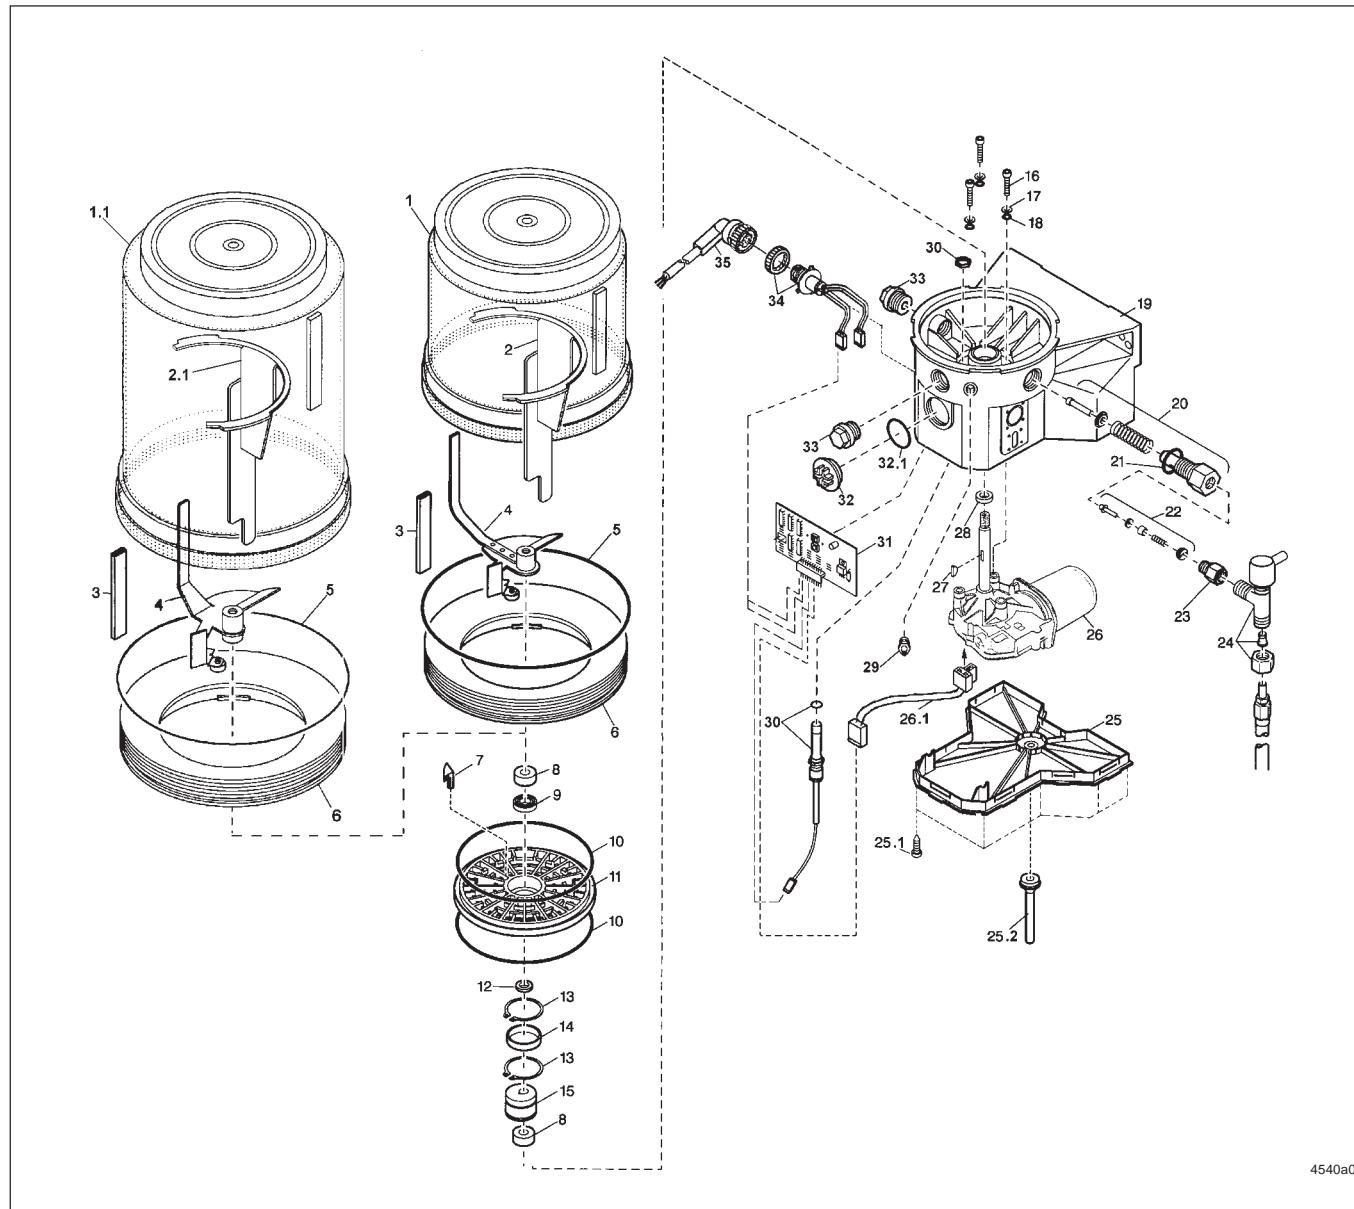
Explosion view for P 203 -4XL/8XL-K-12/24-1A7.16-V10-V13, V20-V23
